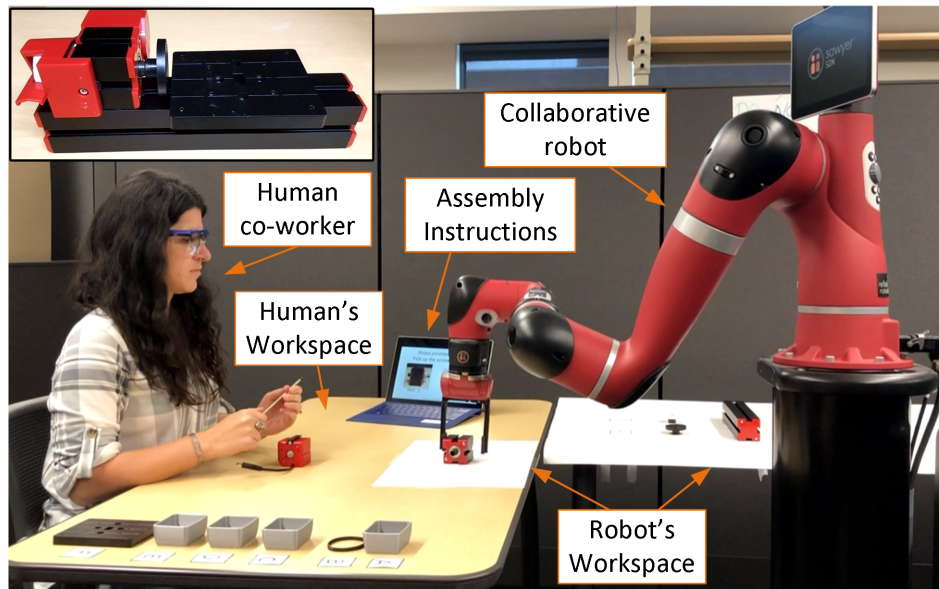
Setup of the Proposed Collaborative Assembly Scenario, *RoboAssist*. Top-left image: Final Assembly Product - A Miniature Sanding Machine. [5] ©2020 IEEE.
